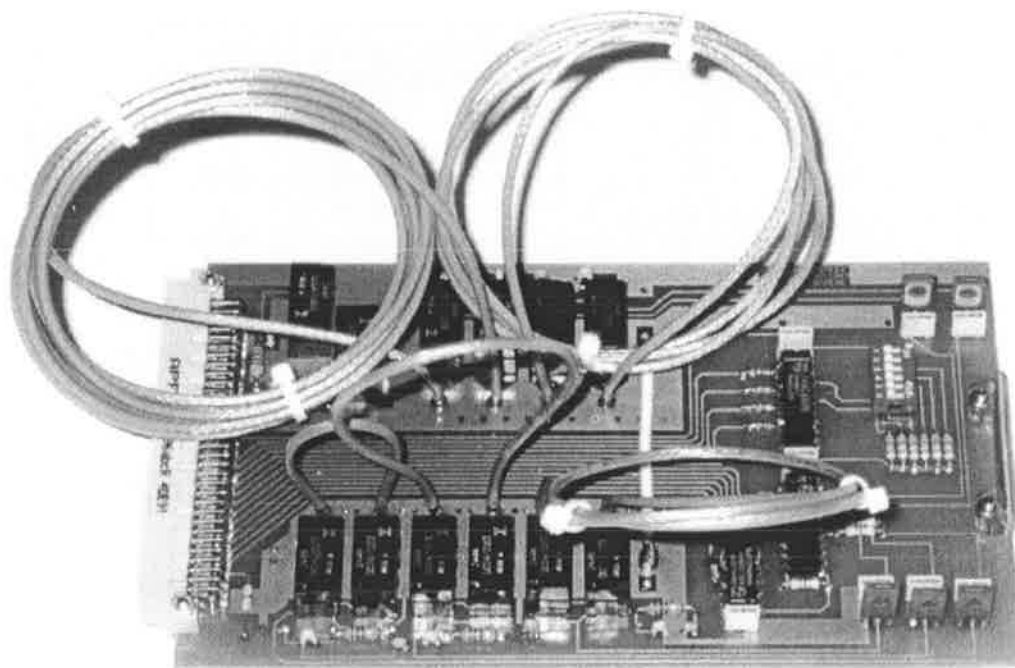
Top face of a beam steering card, note the five phasing cables.
